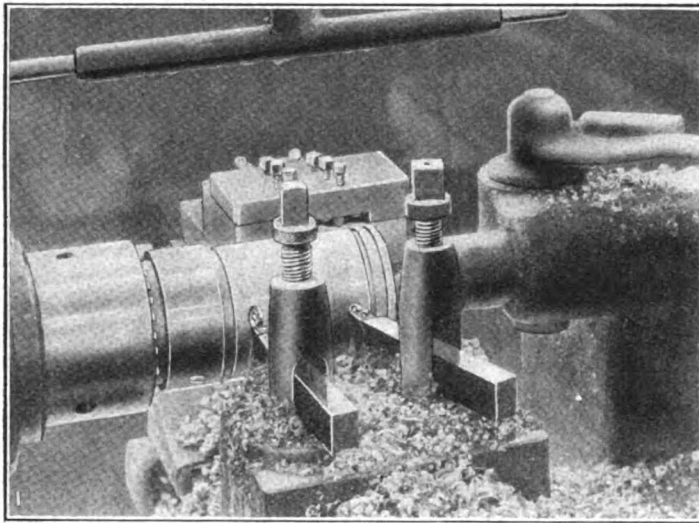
TURNING AND GROOVING ON SEMI-AUTOMATIC MACHINE. FIG. 2. BORING THE PISTON-PIN HOLE
